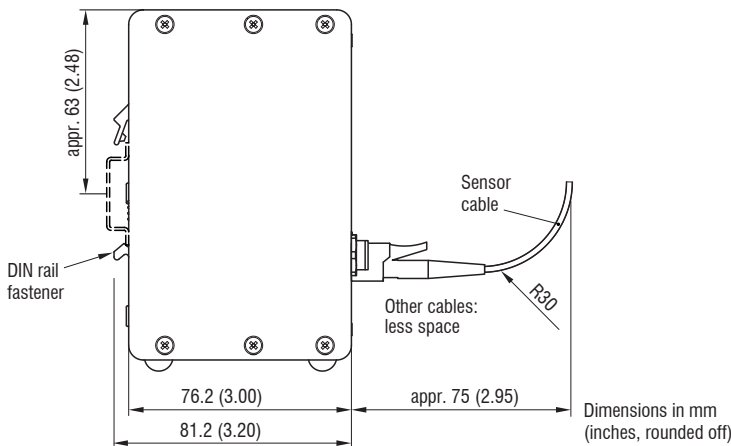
Dimensional drawing side view of the IMC5200 controller
